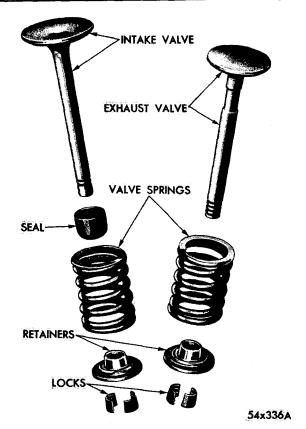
Valves, Springs, Seals and Retainer (Disassembled View)
